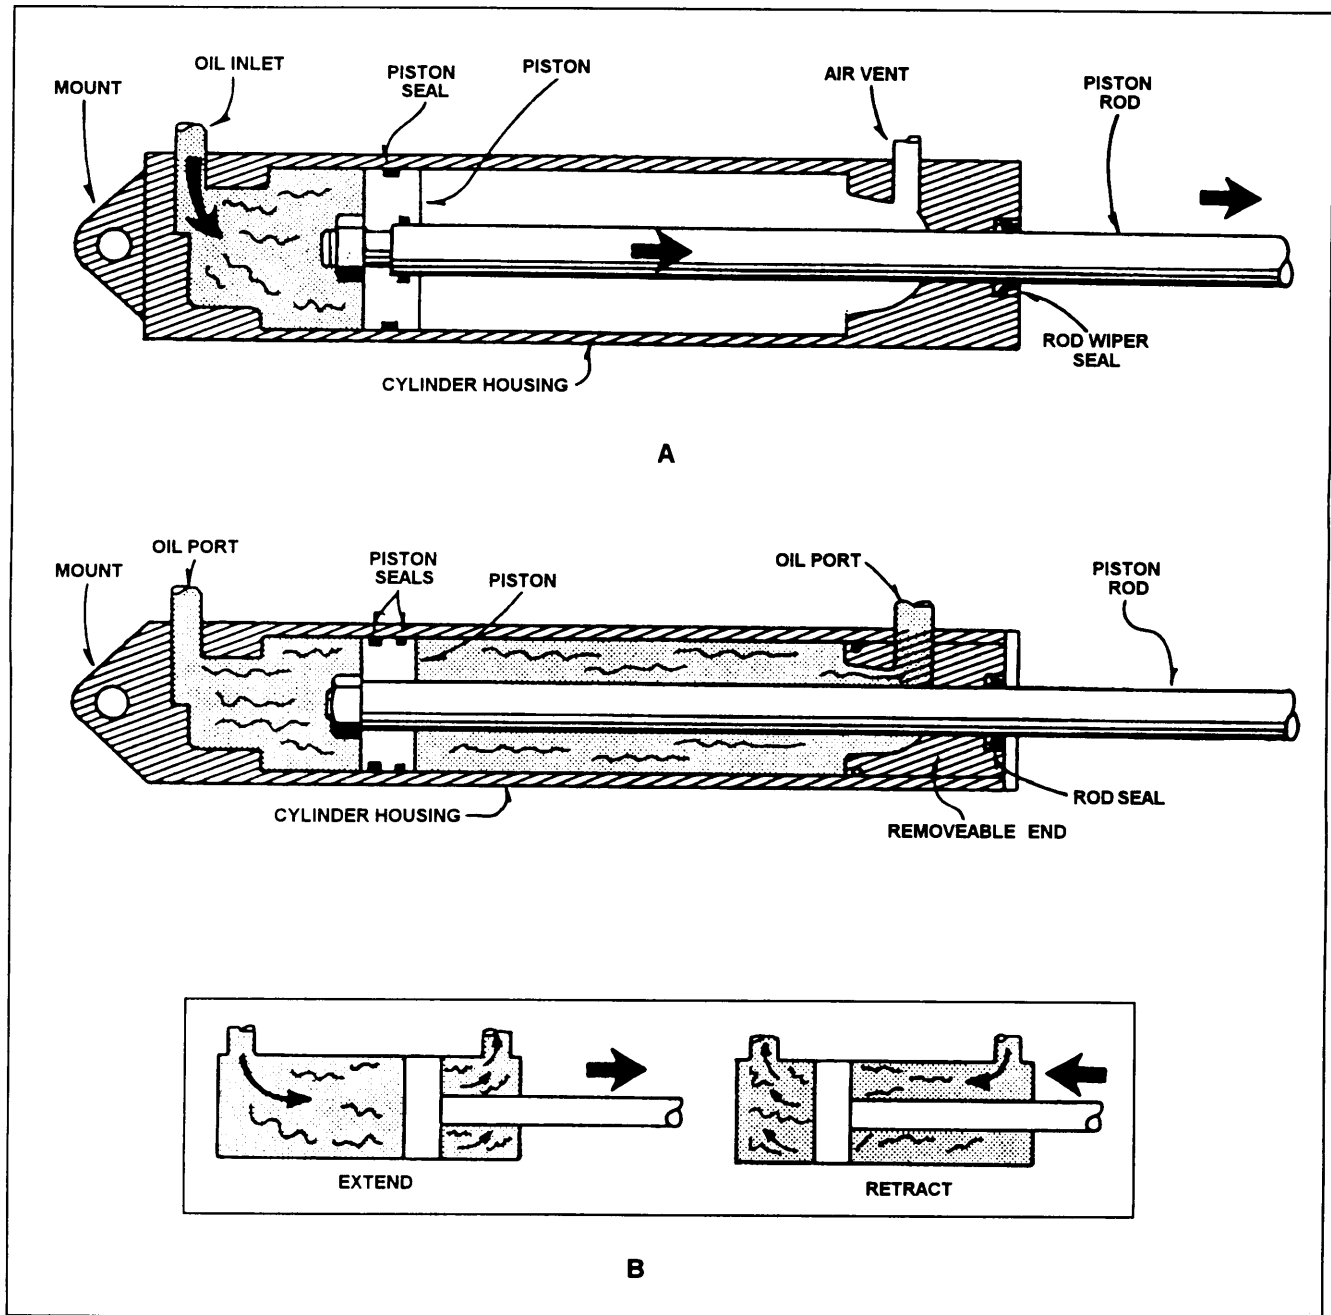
(A) Single- and (B) double-acting hydraulic cylinders.
